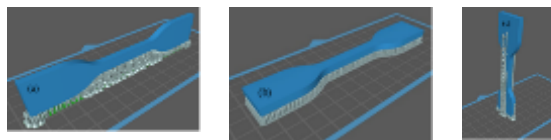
Tensile test specimens ASTM D836 printed at (a) On-Edge, (b) On-Flat and (c) Up-Right directions.
